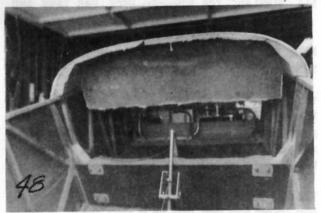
Top deck on fuselage for cure. Tank bottom not installed yet.
